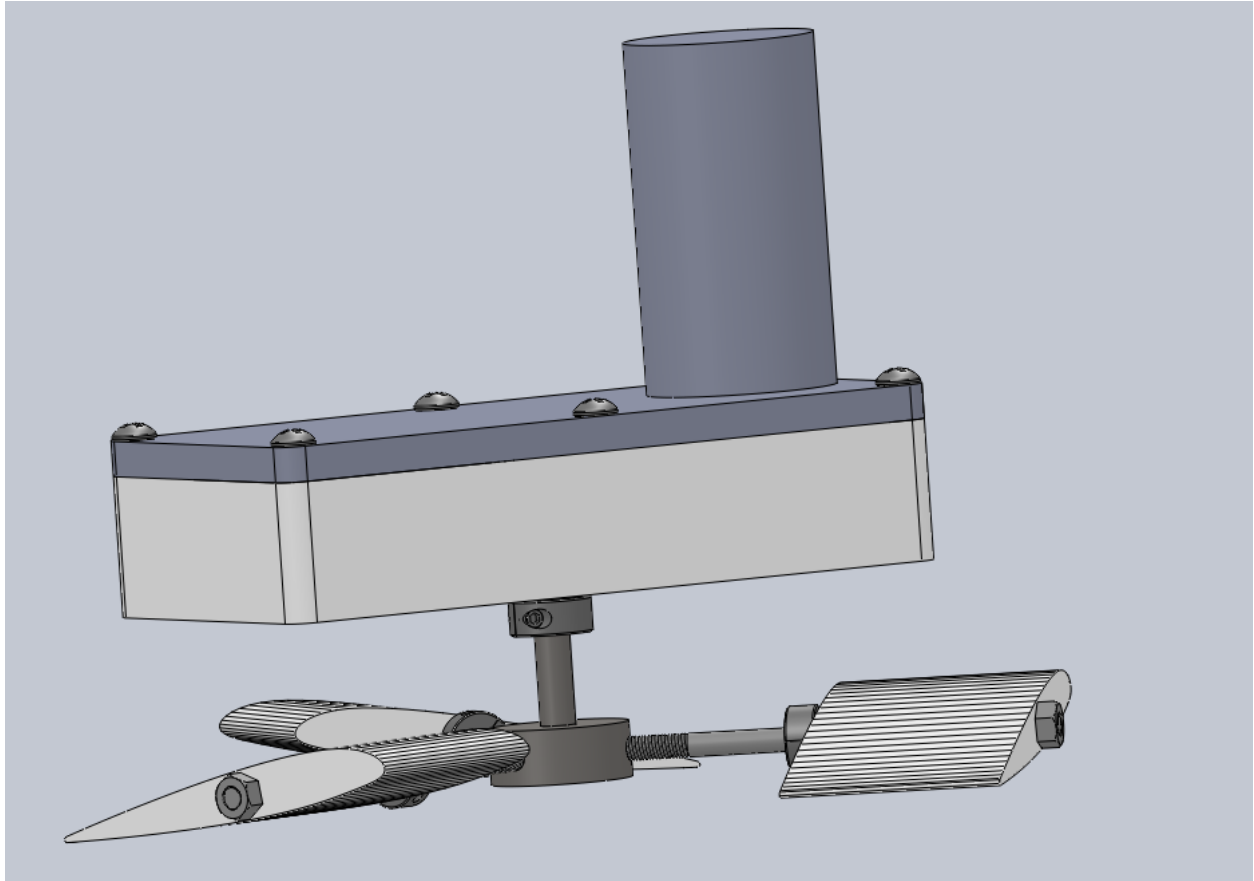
Fully Assembled Hydrofoil Shoe Prototype
